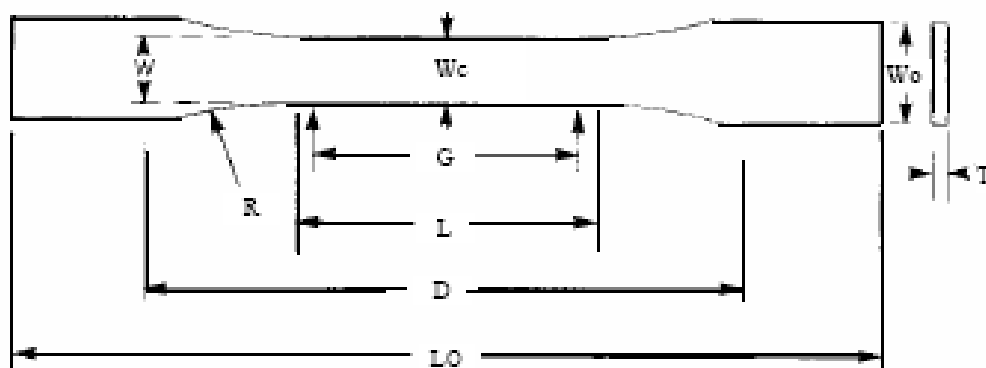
ASTM (D638), dumbbell shape (Type I) specimen
